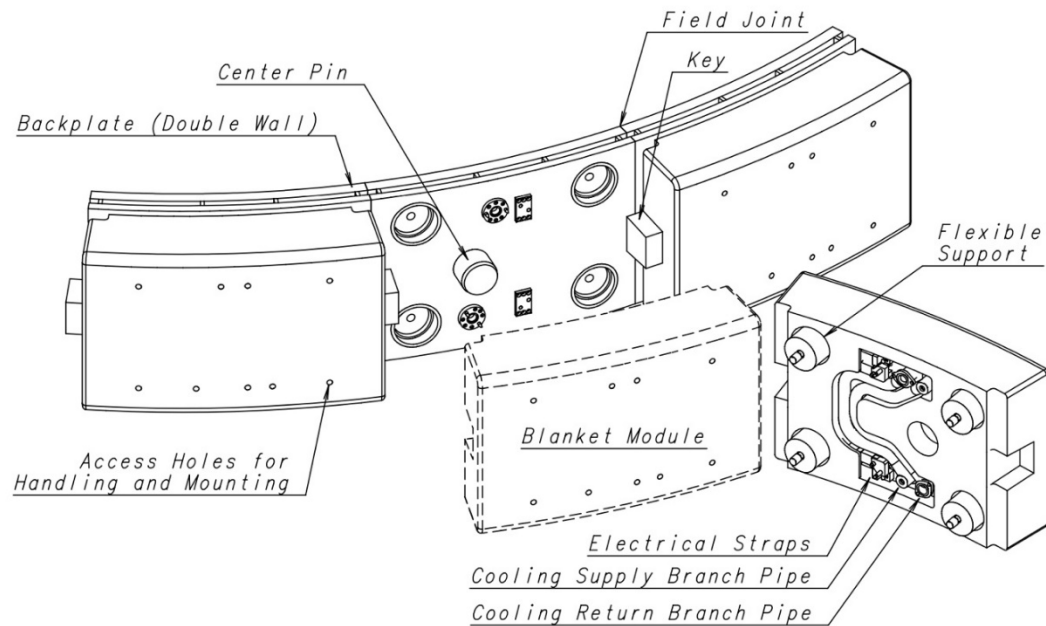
Shielding Blanket Attachment Scheme
